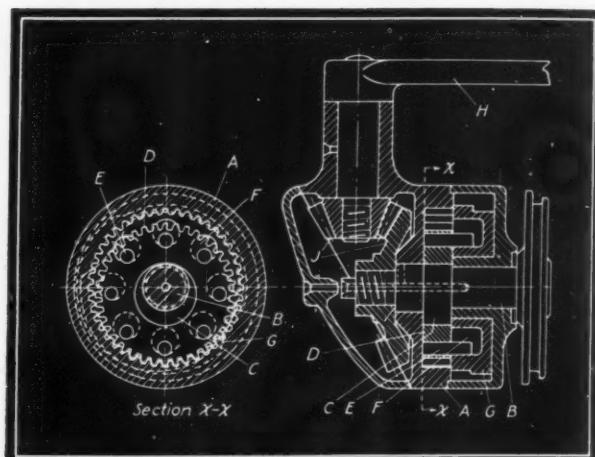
Planetary gear reduction mechanism embodied in can sealing machine furnishes unique idea
